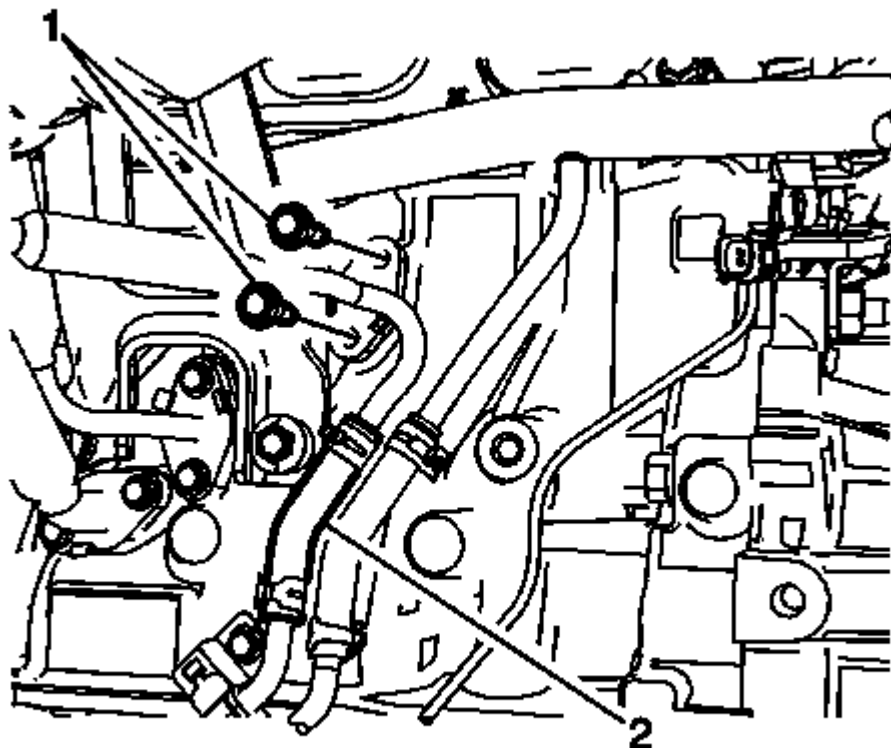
Turbocharger Coolant Feed Pipe Bolts
